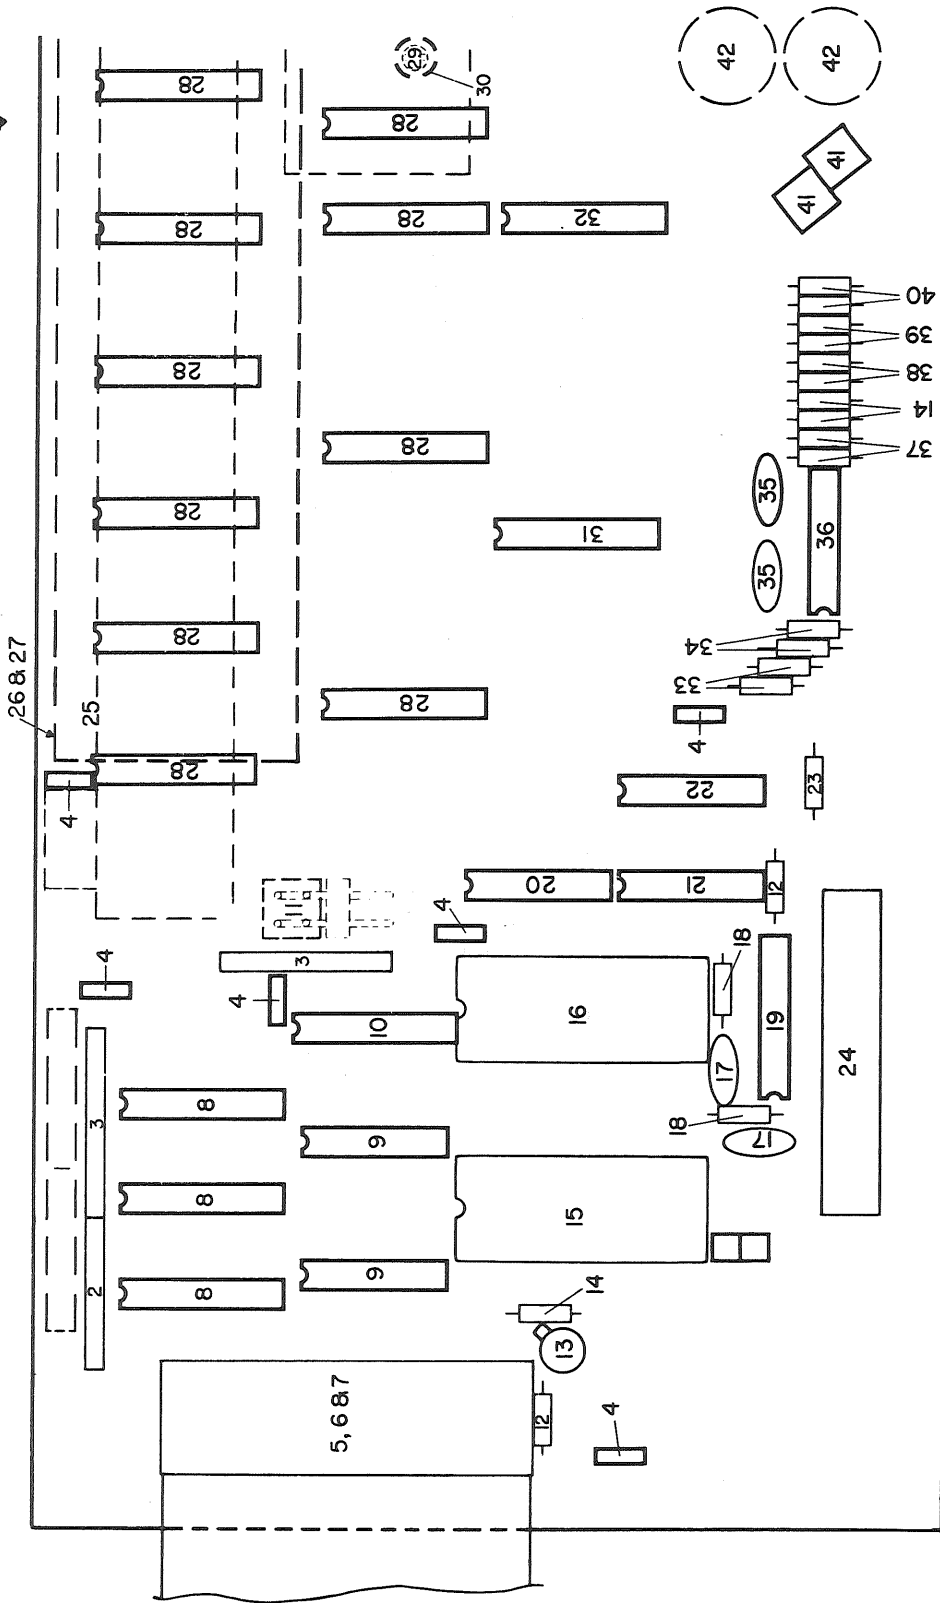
Receiver Control Assembly, Circuit Card, A9 (Sheet 1 of 2)
